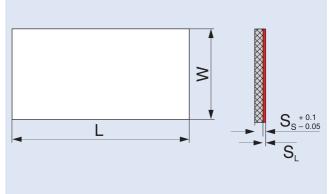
Drawing of deva.tex® sliding plates
